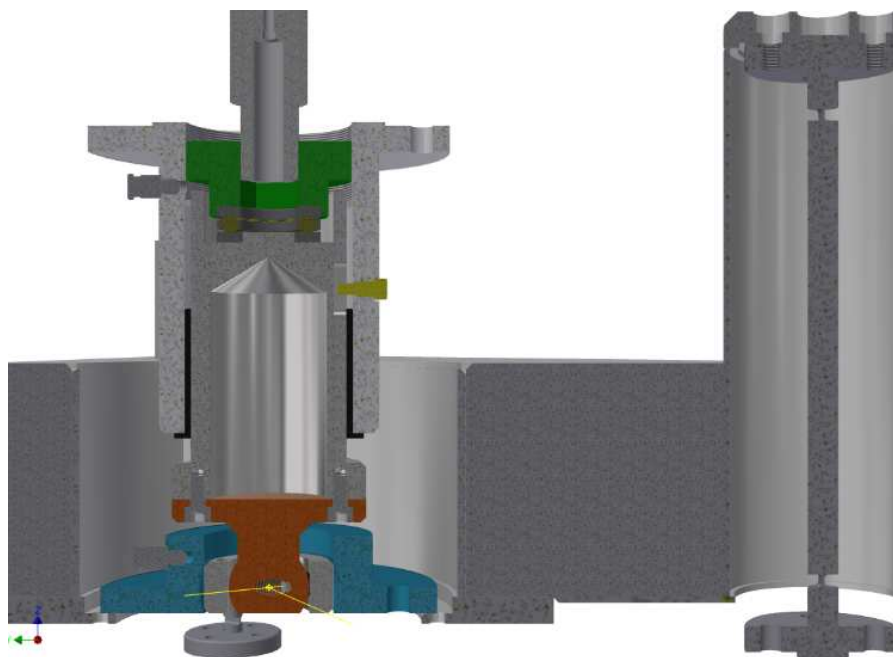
Section of M2 actuator and Loadspreader flexure
